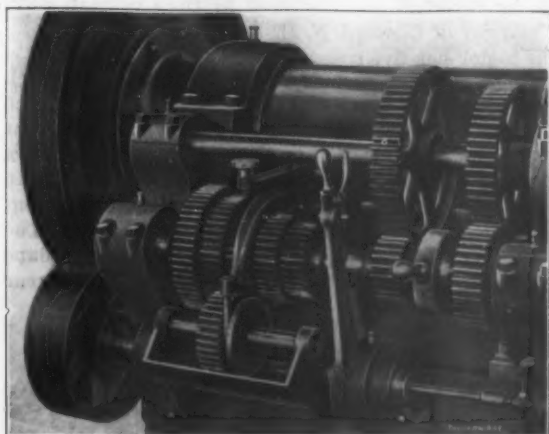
A nearer View of the Speed Changing Mechanism, Showing the Gears with Cover Removed.
